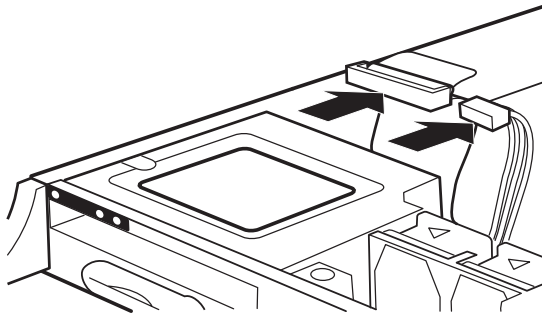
Disconnecting the Cables From the DVD Assembly
